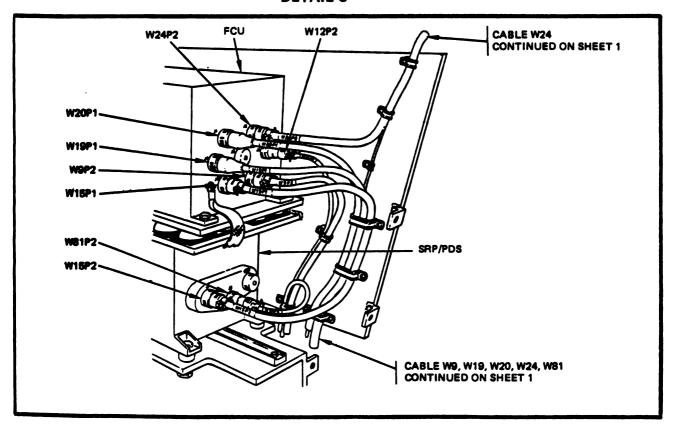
Cage Interconnecting Cable Assemblies (Sheet 3 of 5)
